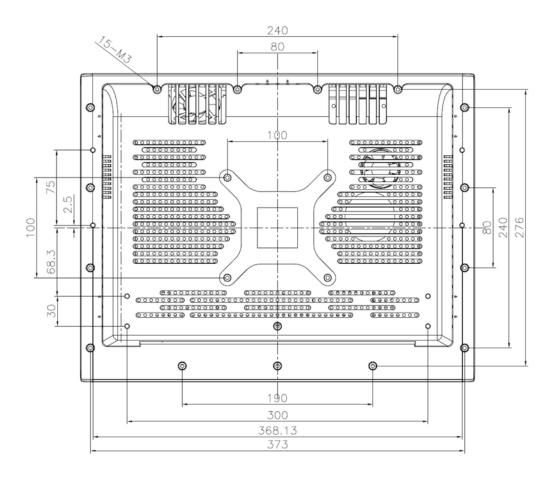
AFL-15B-915 Rear Dimensions (units in mm)
